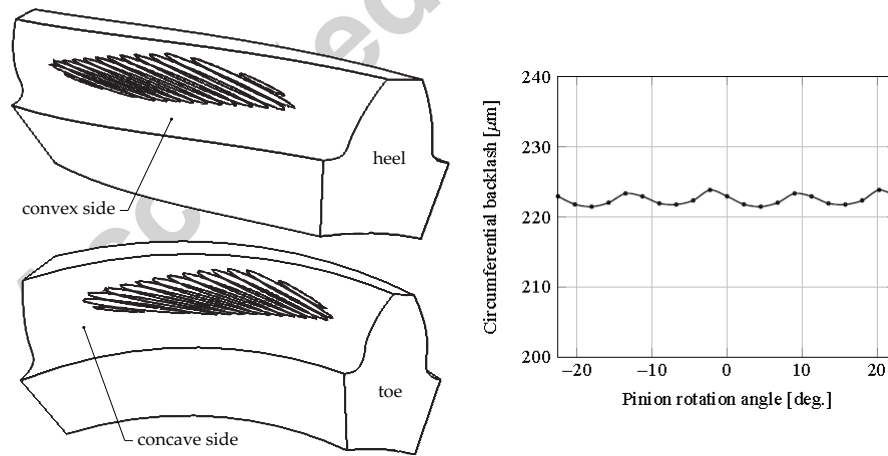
Contact pattern on both sides of pinion tooth and backlash evolution for a misaligned gear drive with adjusted bearing contact and errors compensation.
